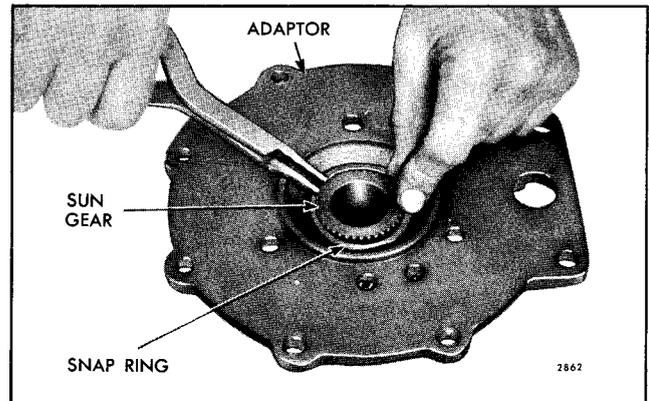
Removing or Installing Sun Gear Snap Ring (2.1:1 Ratio)
